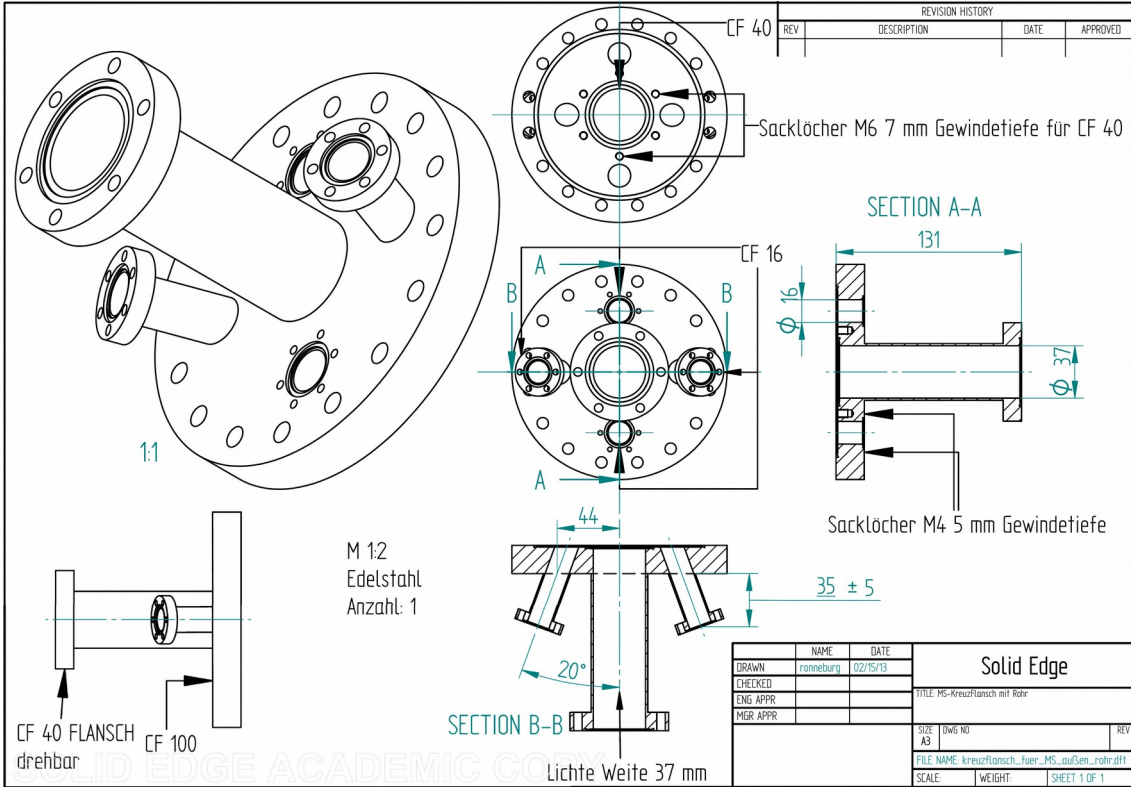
Flange, to connect mass spectrometer, valves and TPD flange cross.
